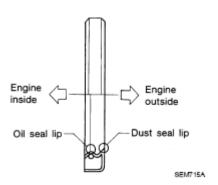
Applying Engine Oil To Both Oil Seal Lip And Dust Seal Lip Courtesy of NISSAN MOTOR CO., U.S.A.
